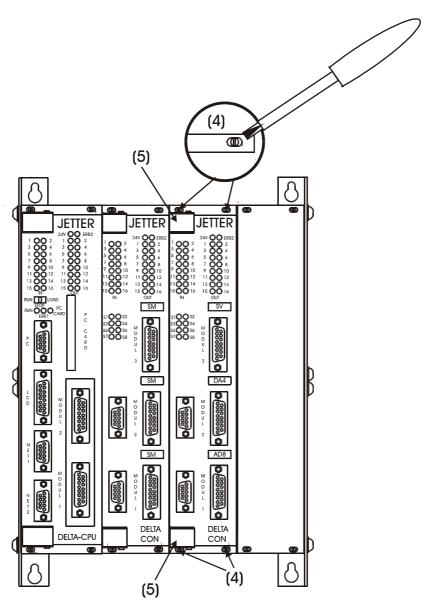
Front view of the DELTA basic housing equipped with basic modules
